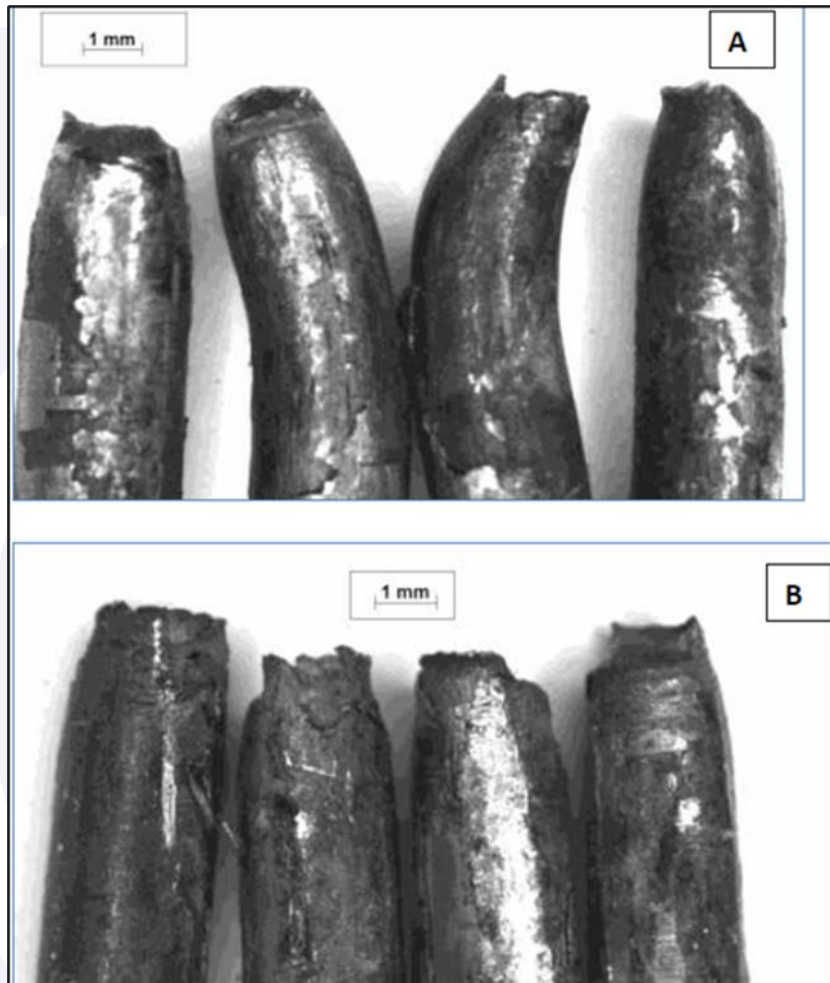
Photo stereoscopies of the cable removed from the engine shaft (A) and cable submitted to the traction test (B).
